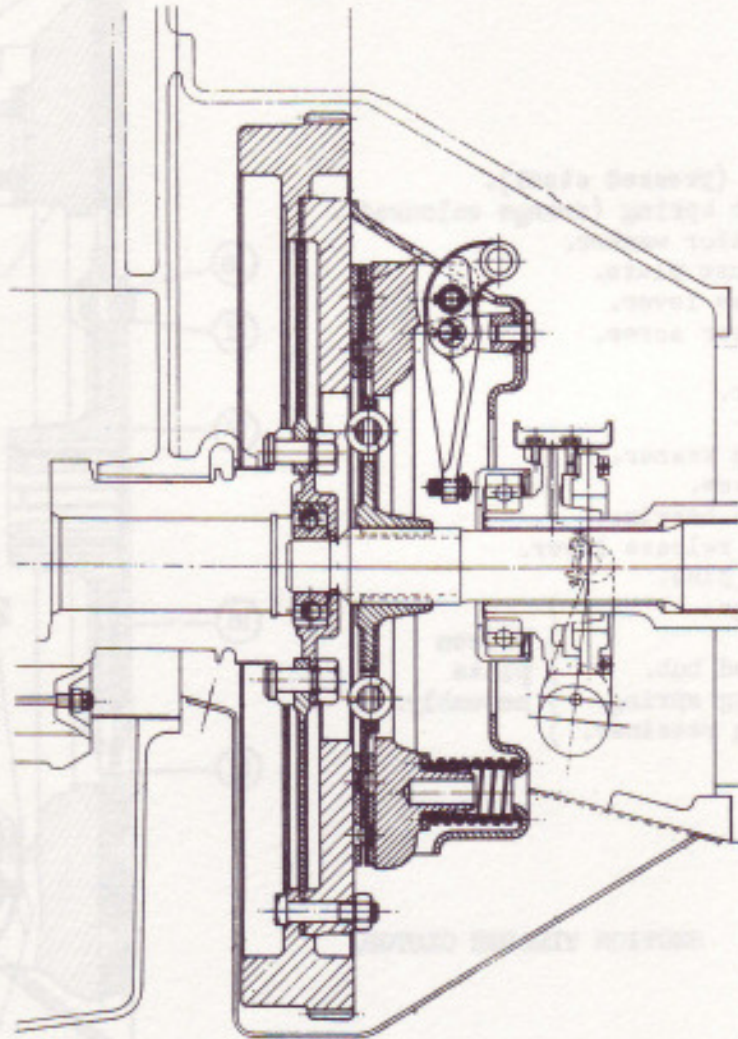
SECTION THROUGH FLYWHEEL AND CLUTCH.
